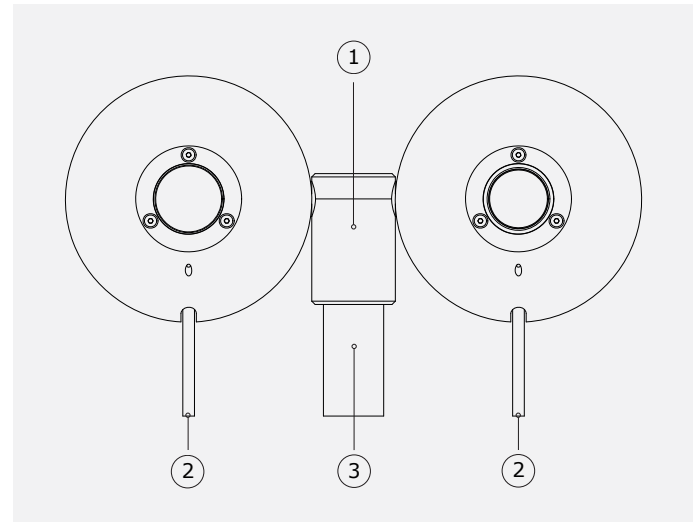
Top view of RA01: (1) leveling assembly for x- and y-axis, (2) cables, (3) mounting tube (not included).
